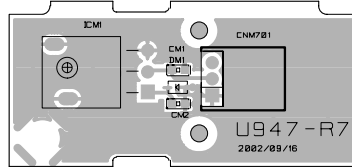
U003 Sensor PC Board (Top side)
